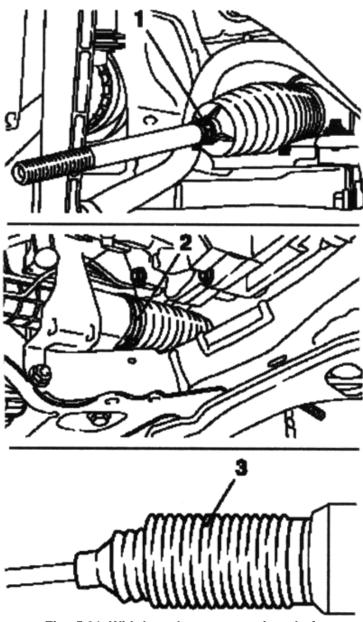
Withdrawal cover steering draft: 1,2 - Fixing brackets, 3 - cover
